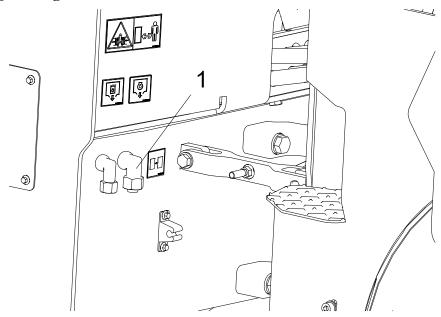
Discharge Point (1) of Engine Lubrication oil
